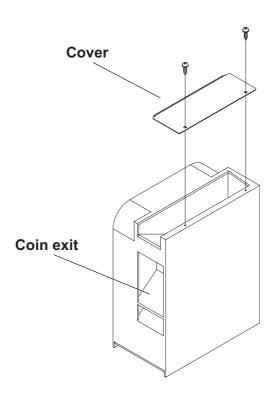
The Mk4 Universal Hopper used in the ES500 Machine
